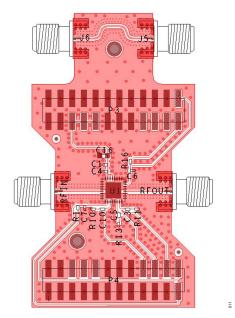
ADPA1120-EVALZ Assembly Drawing (J5 and J6 Not Installed)
